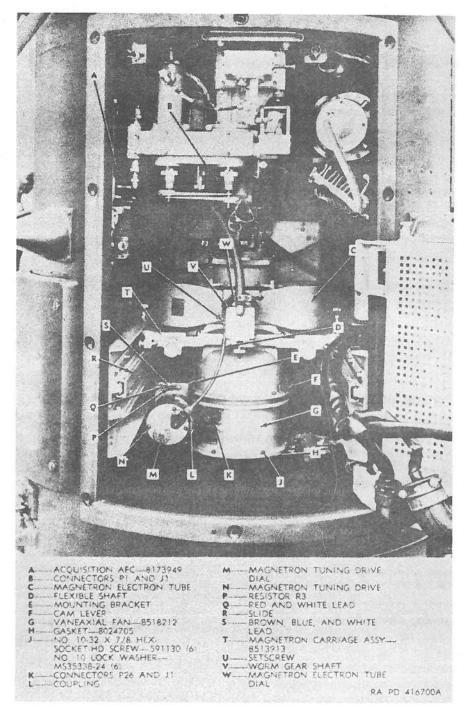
Magnetron tuning drive and vaneaxial fan-locational view.
